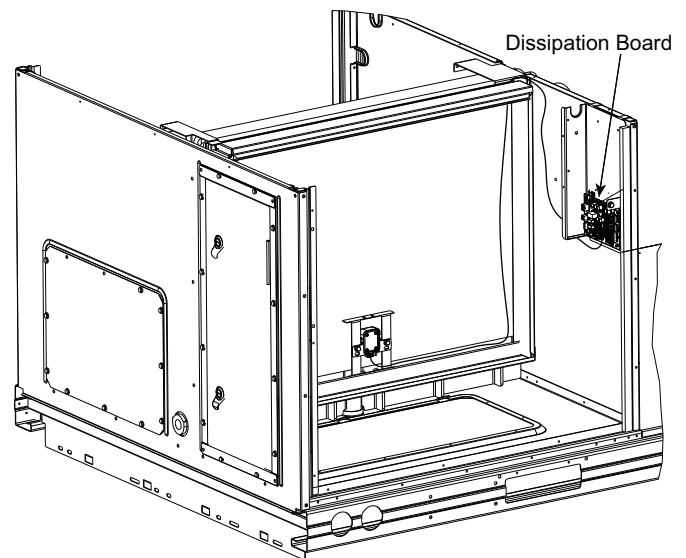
Typical Location of Dissipation Control Board (Shown with Dust Cover Removed, 3-6 Ton Rooftop Unit Shown)
